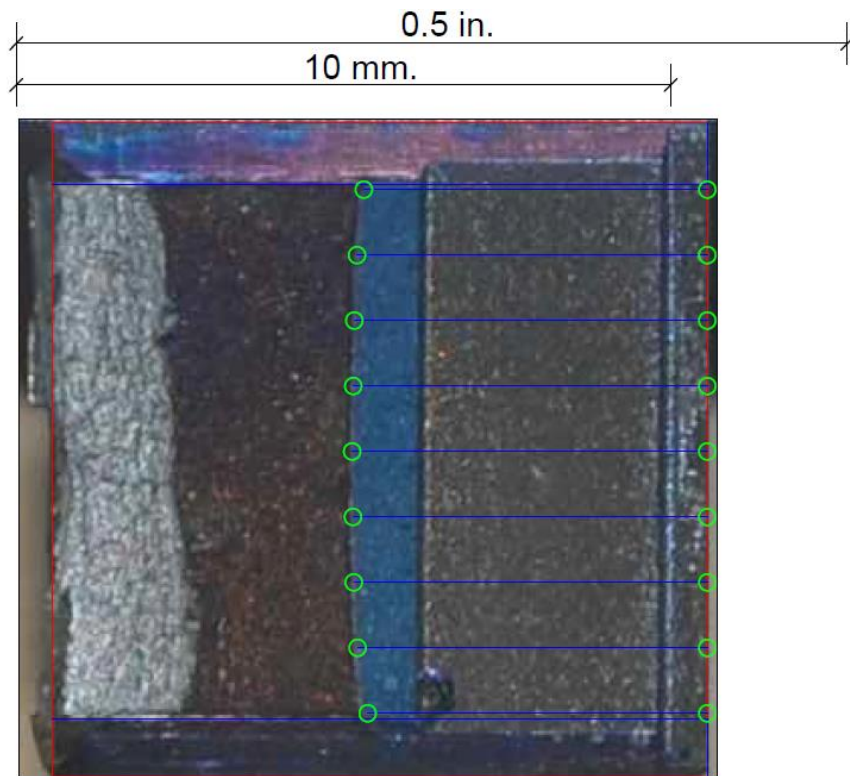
Specimen F1' Fracture Surface
